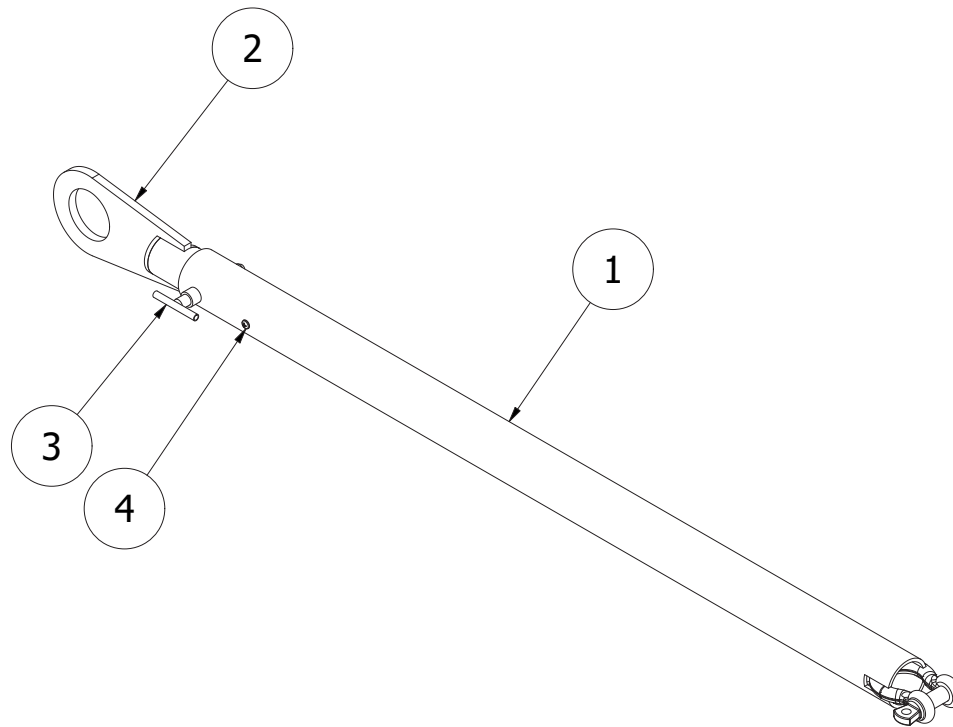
AGSE-E22117-S01 Tow Bar Assembly
